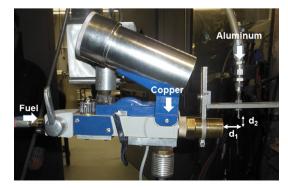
Experimental set-up of co-injection flame spraying technique.
